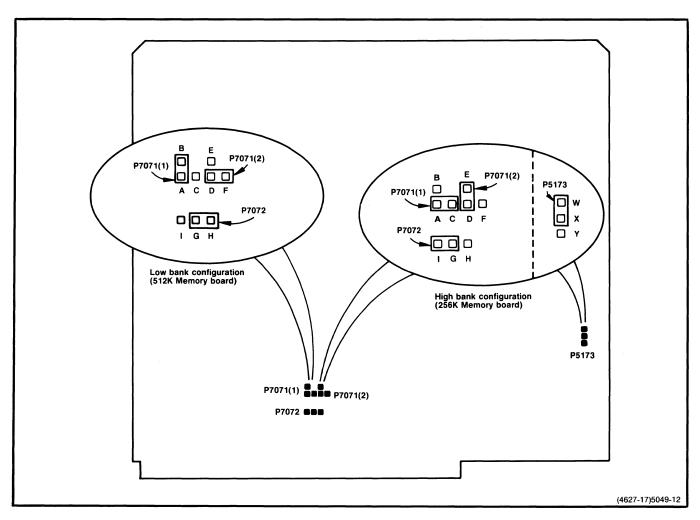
Jumper locations for a 256K and a 512K Memory Board installed.
